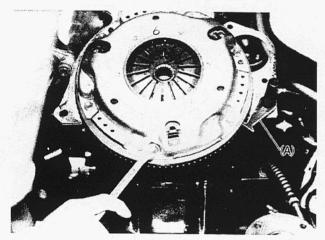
(A) Special tool (Flywheel holder 09924-17810)
